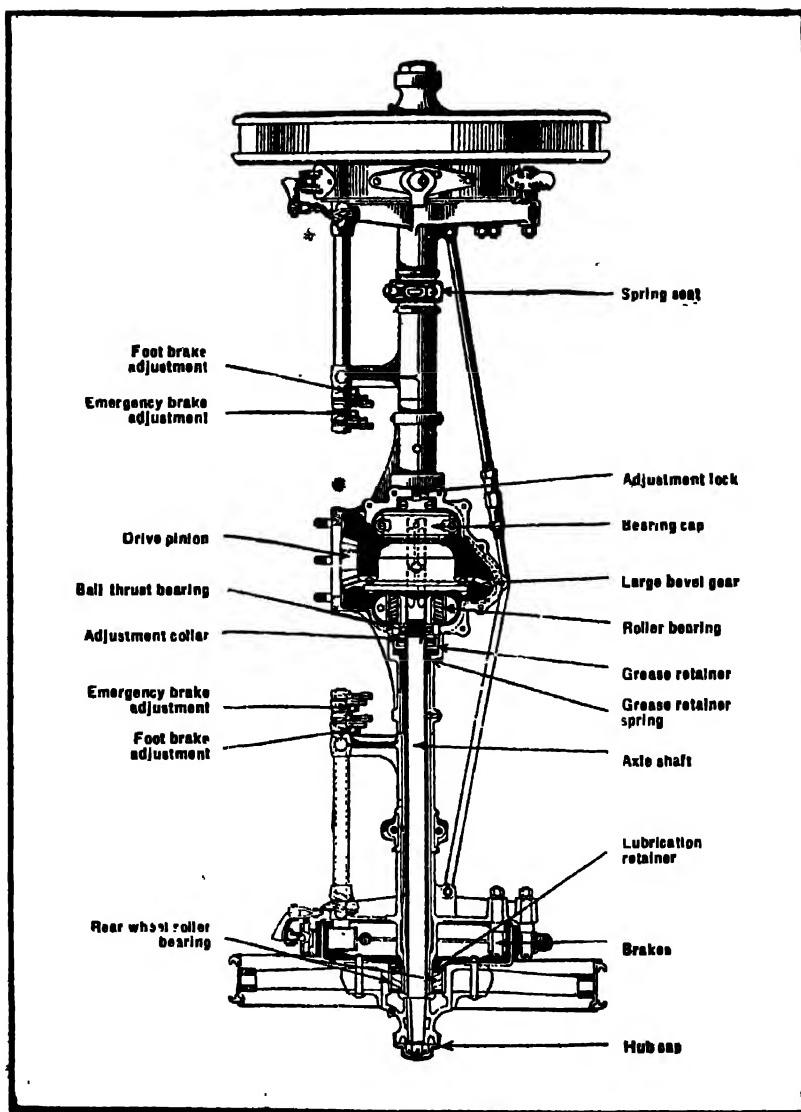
Part Sectional View, Showing Construction of Overland Three-Quarter Floating Axle.
